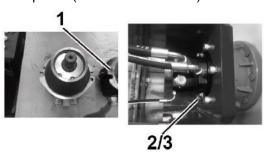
Rear axle motor assembly 1. O-ring 2. Bolt 3. Washer
